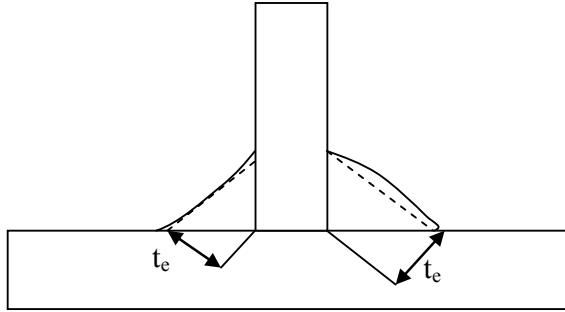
Throat Thickness of a Fillet Weld
